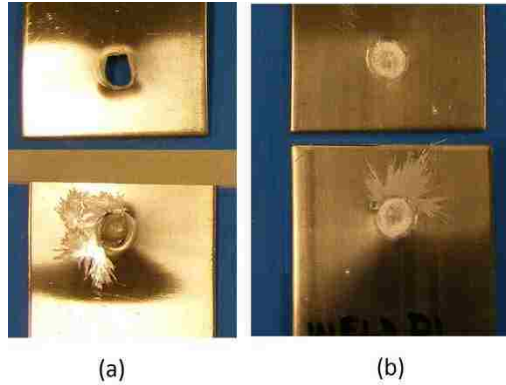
Failure modes observed with RSW lap joints; (a) 1.3 mm sheets, nugget pull-out, (b) 1.75 mm sheets, nugget shearing.
